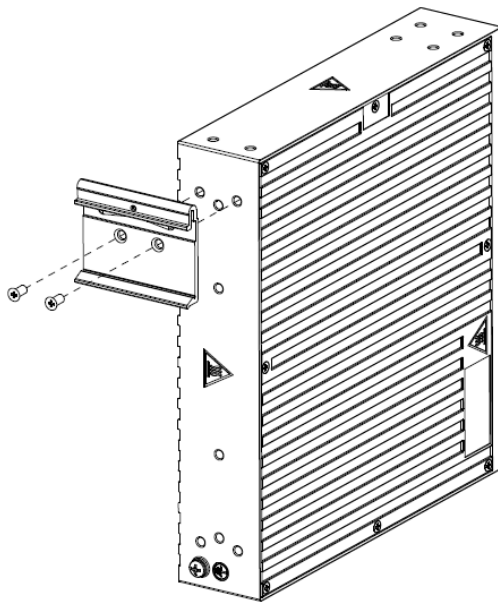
DIN Rail Mounting Option 1: Attach the Bracket
